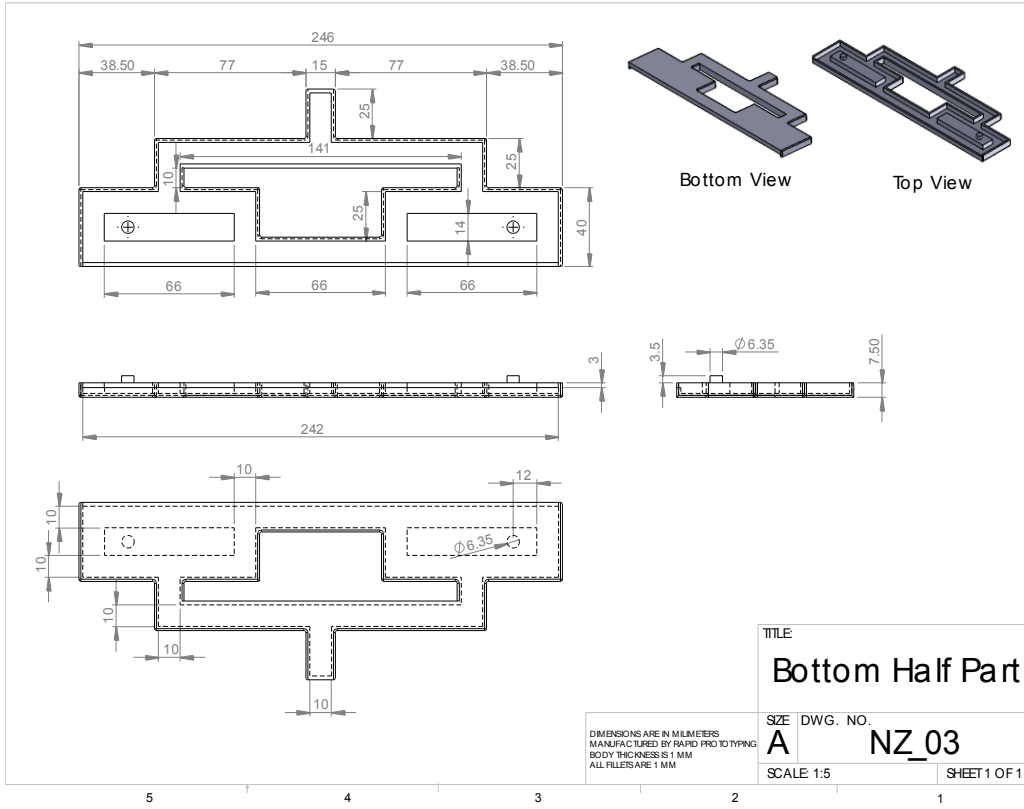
Isometric, top, front, bottom and side views of the nozzle parts fabricated separately by rapid prototyping.
